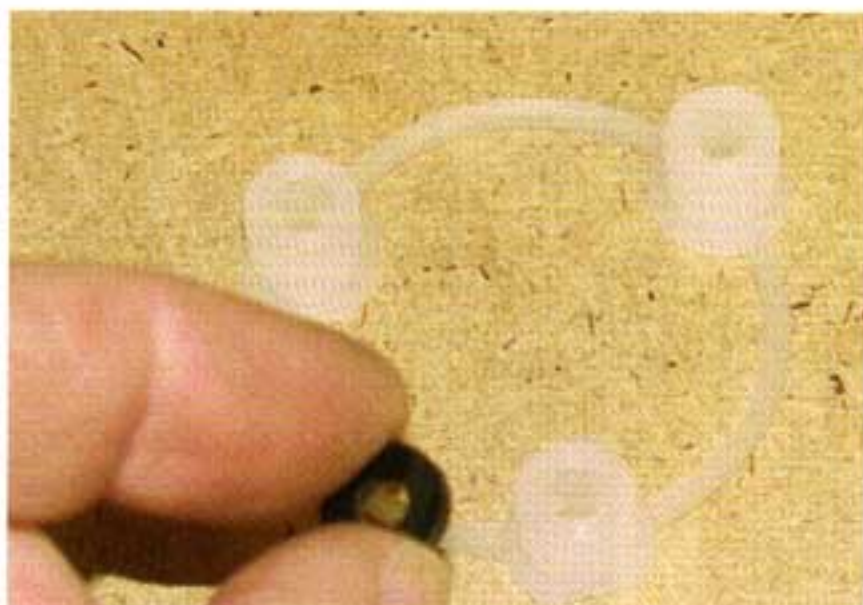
Using the three #10 machine screws, install the Bellville washer, horn insulator, horn ring and horn ring bushing. The screws will hold the horn ring tight but still allow the horn ring to tilt and make the horns operate.
